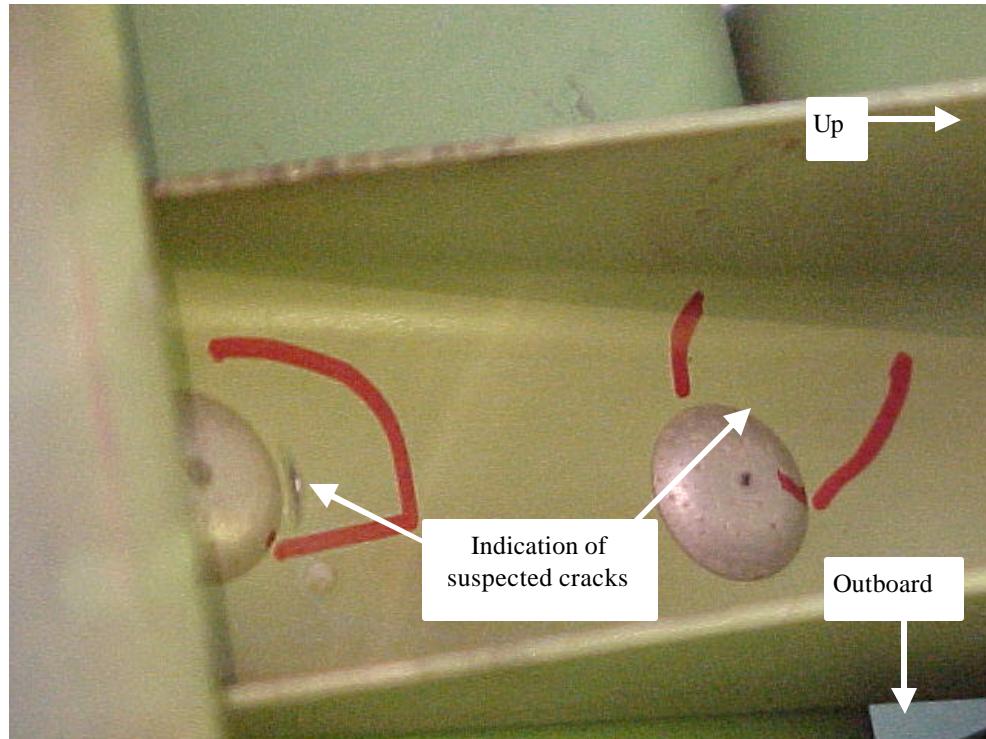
Photograph of stringer clip at FS 720A, stringer 4R. Detailed visual inspection discovered an indication.
